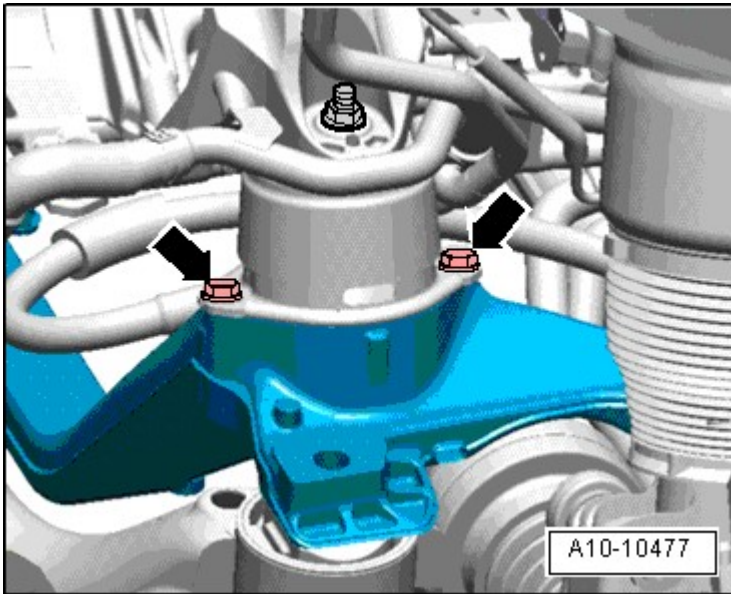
Identifying Engine Bracket Bolts At Left And Right
